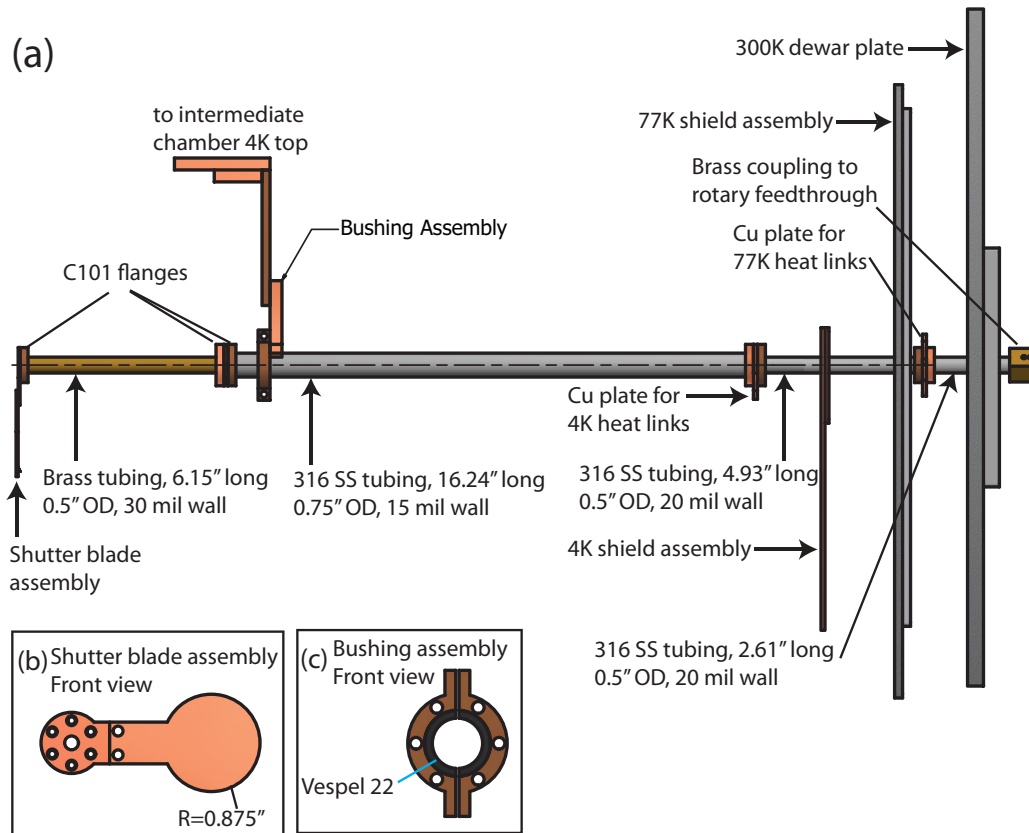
(a) Drawing of the cryogenic shutter assembly. (b) Front view of the shutter blade. (c) Front view of the bushing assembly.
